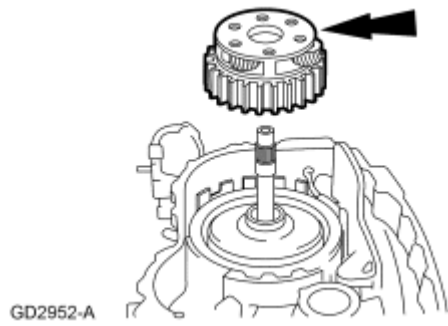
Reverse/Overdrive Carrier Assembly & No. 8 Thrust Bearing
